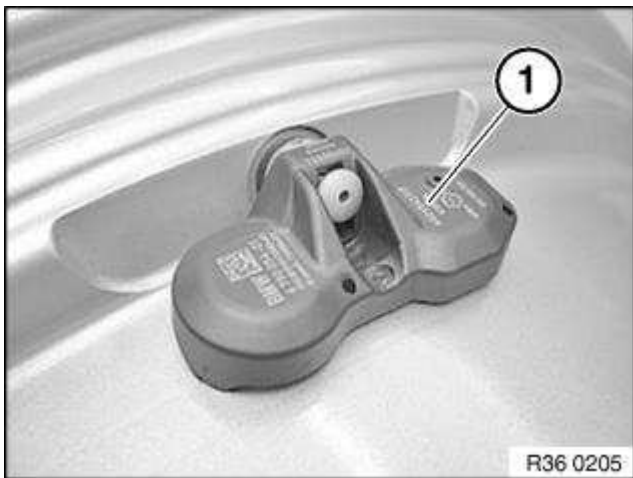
Remove Wheel Module And Valve (1) From Valve Hole
